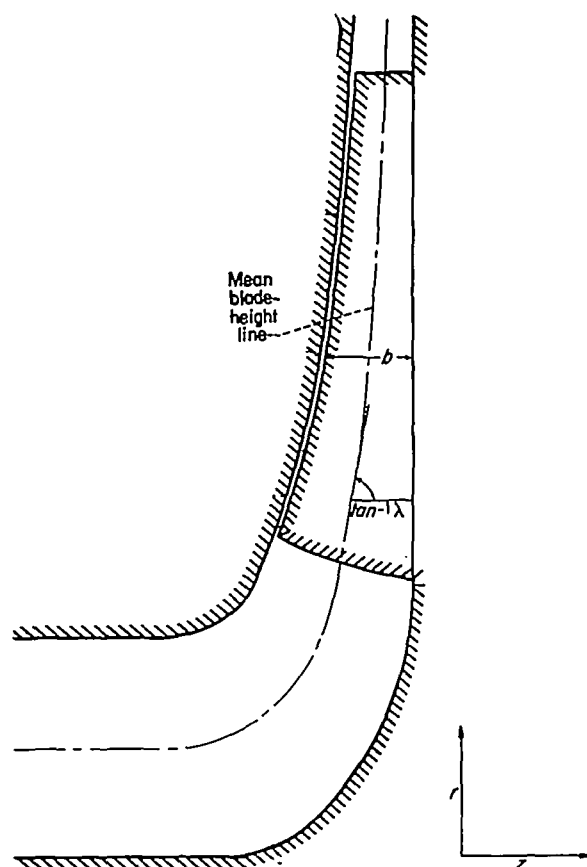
Axial-radial plane view of 48-inch-diameter centrifugal impeller.
